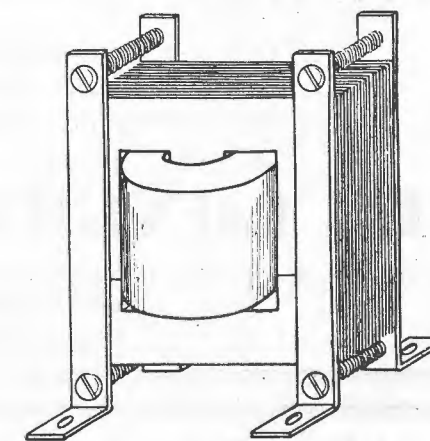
Sketch of clamped assembly system to be used for auto-transformers T1 and T2.
